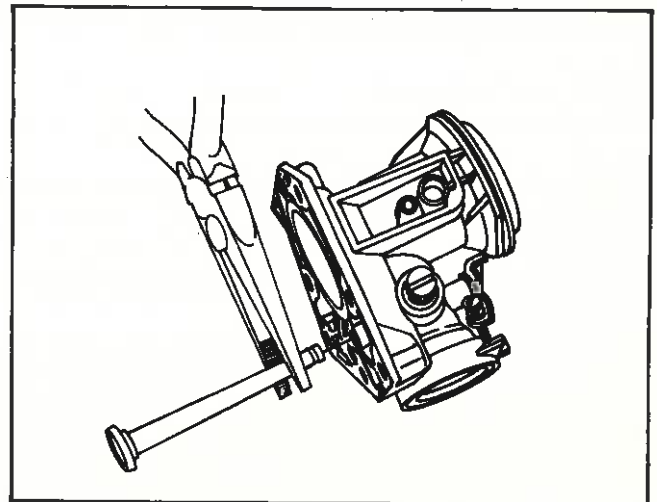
Replacing Fuel Pipe, Minlon Carburetor
